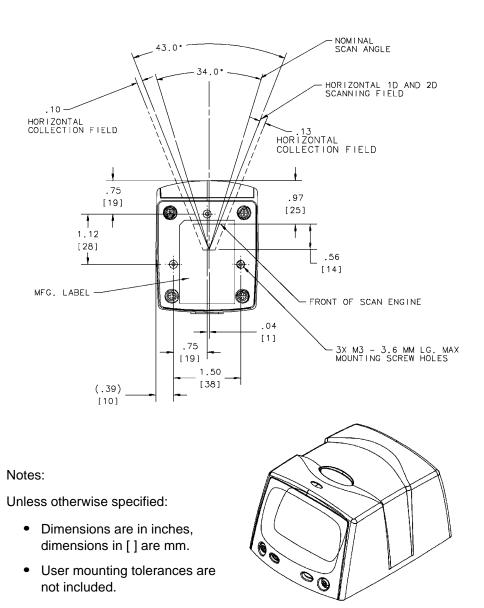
Symbol MS2204VHD Mechanical Drawing
